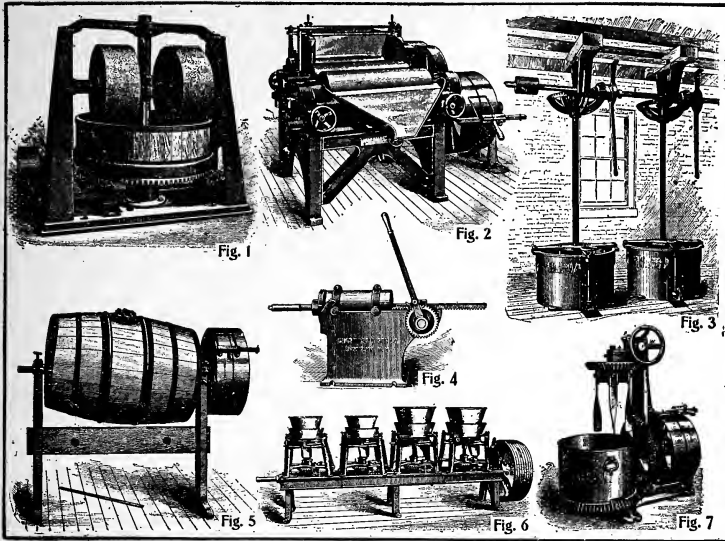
New Portable Revolving Bed Chaser or Pan Mill. Fig. 2--Three Roller Mills. Fig. 3--White Lead and Color Mixers. Fig. 4--Collapsible Tube Filler. Fig. 5--Eccentric Varnish Cutter and Mixer. Fig. 6--Color Mills. Fig. 7--Ink Mixer
